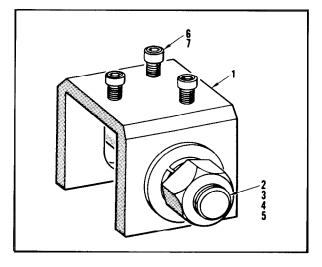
Vibration Transducer Inlet Housing Adapter, Part No. 171575, Location of Parts
